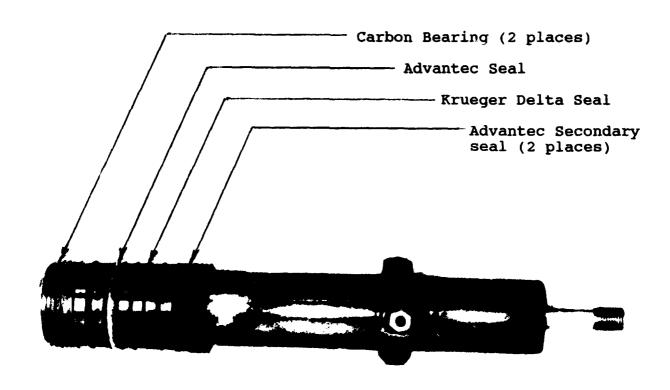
PRESCREEN TEST MODULE PISTON SUBASSEMBLY FOLLOWING SECOND PRESCREEN TEST.
